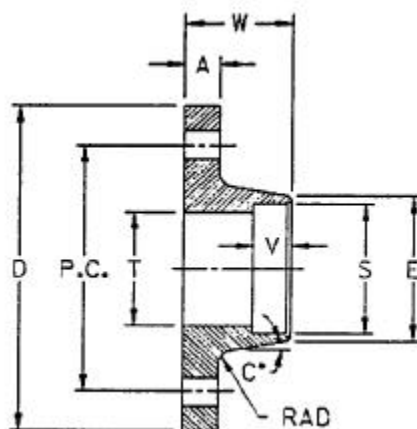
Detail dimensions of groove for preinserted ring of silver brazing alloy.
